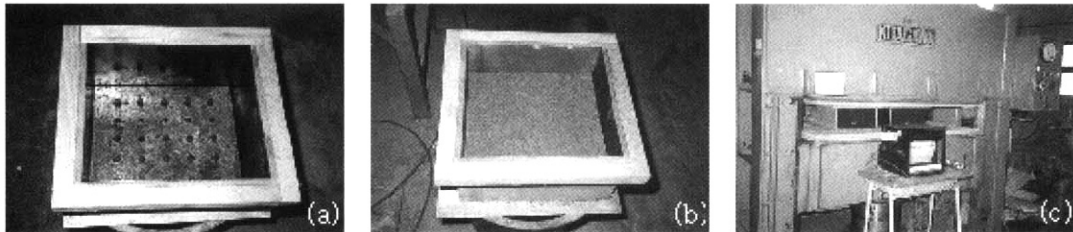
Forming and pressing for concave hole (□) shaped composite board. (a) forming box, (b) prepared mat, and (c) pressing.
